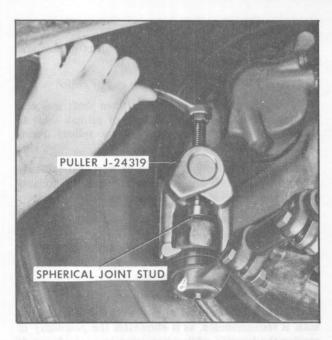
Removing Tie Rod End From Steering Knuckle
